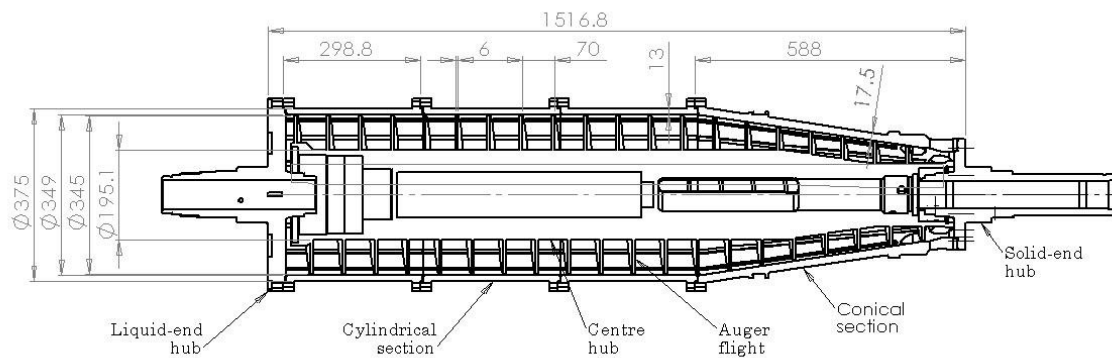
Cross-section of the rotating assembly with key dimensions (mm) and component labels
